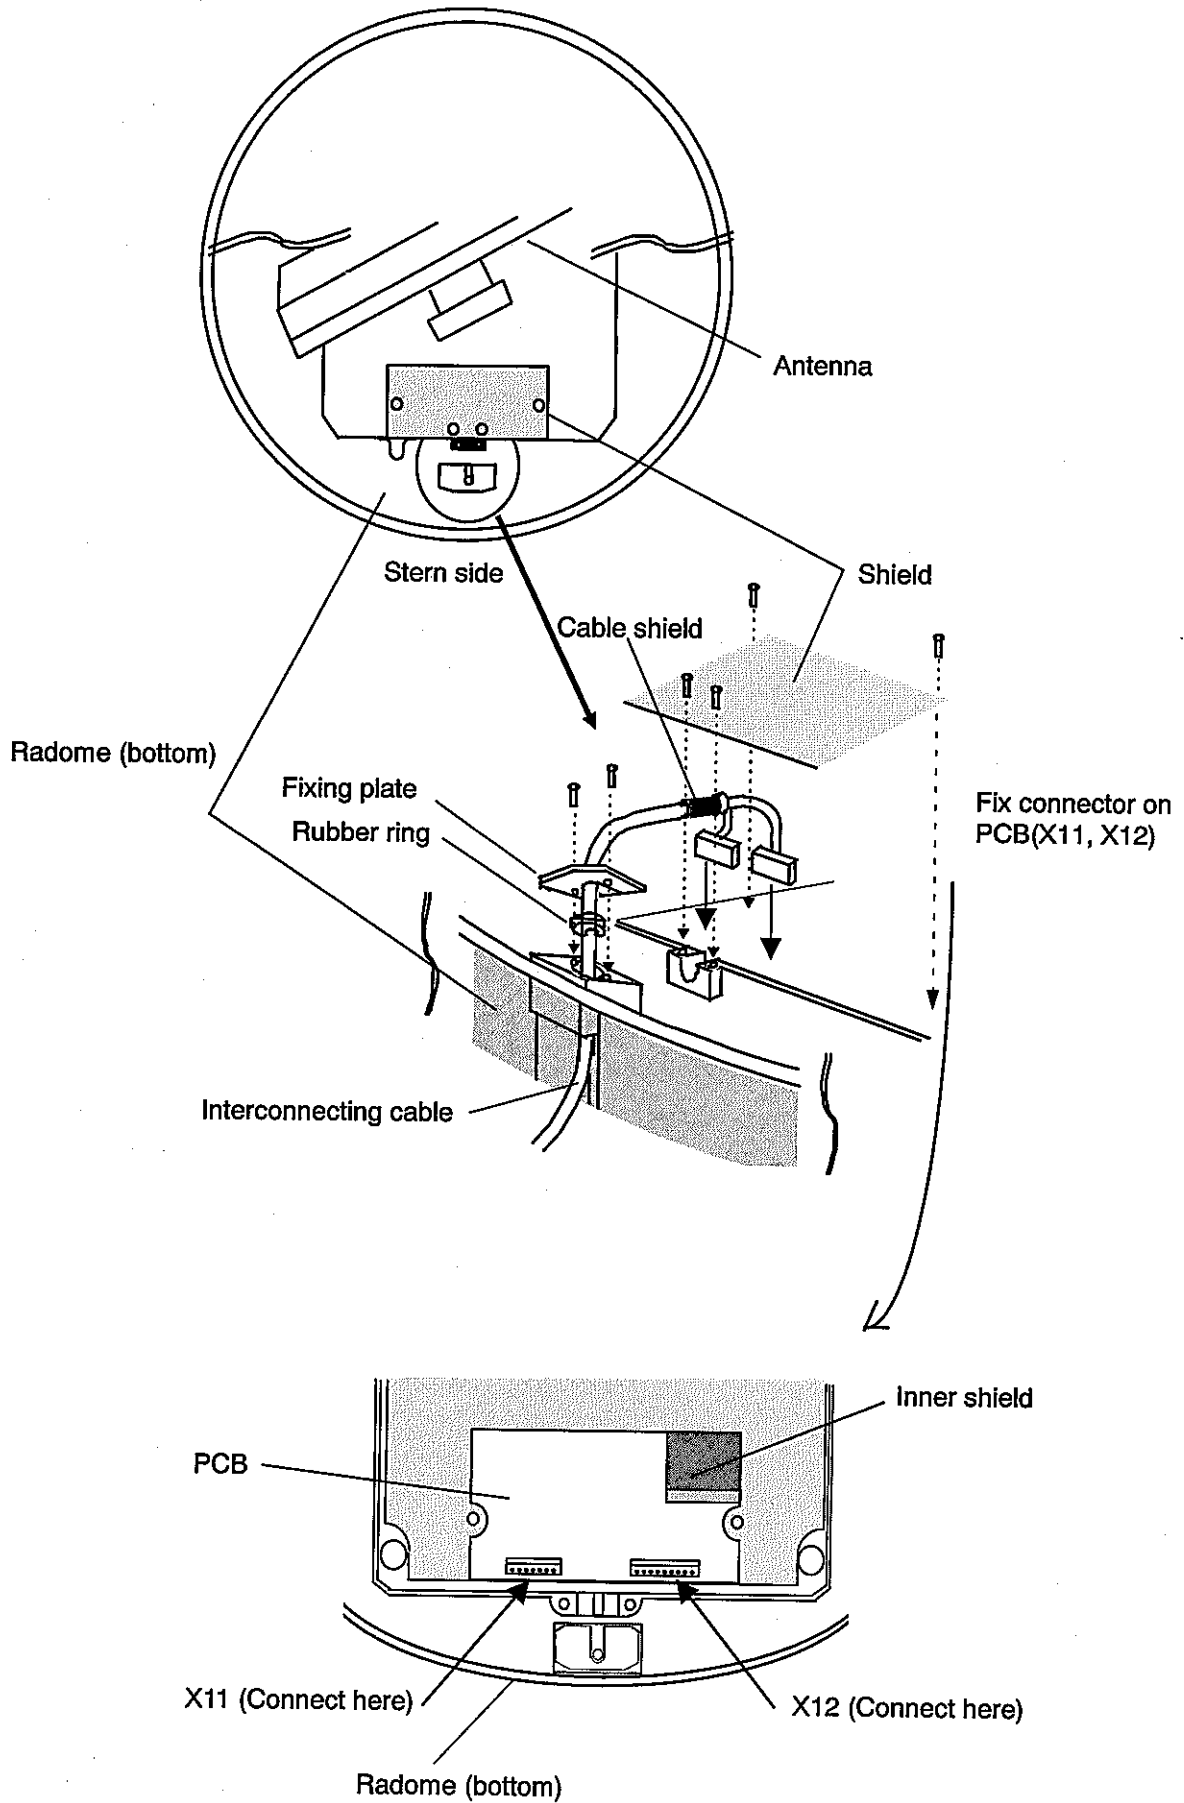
Fitting the interconnecting cable (Radome type RB715A)
